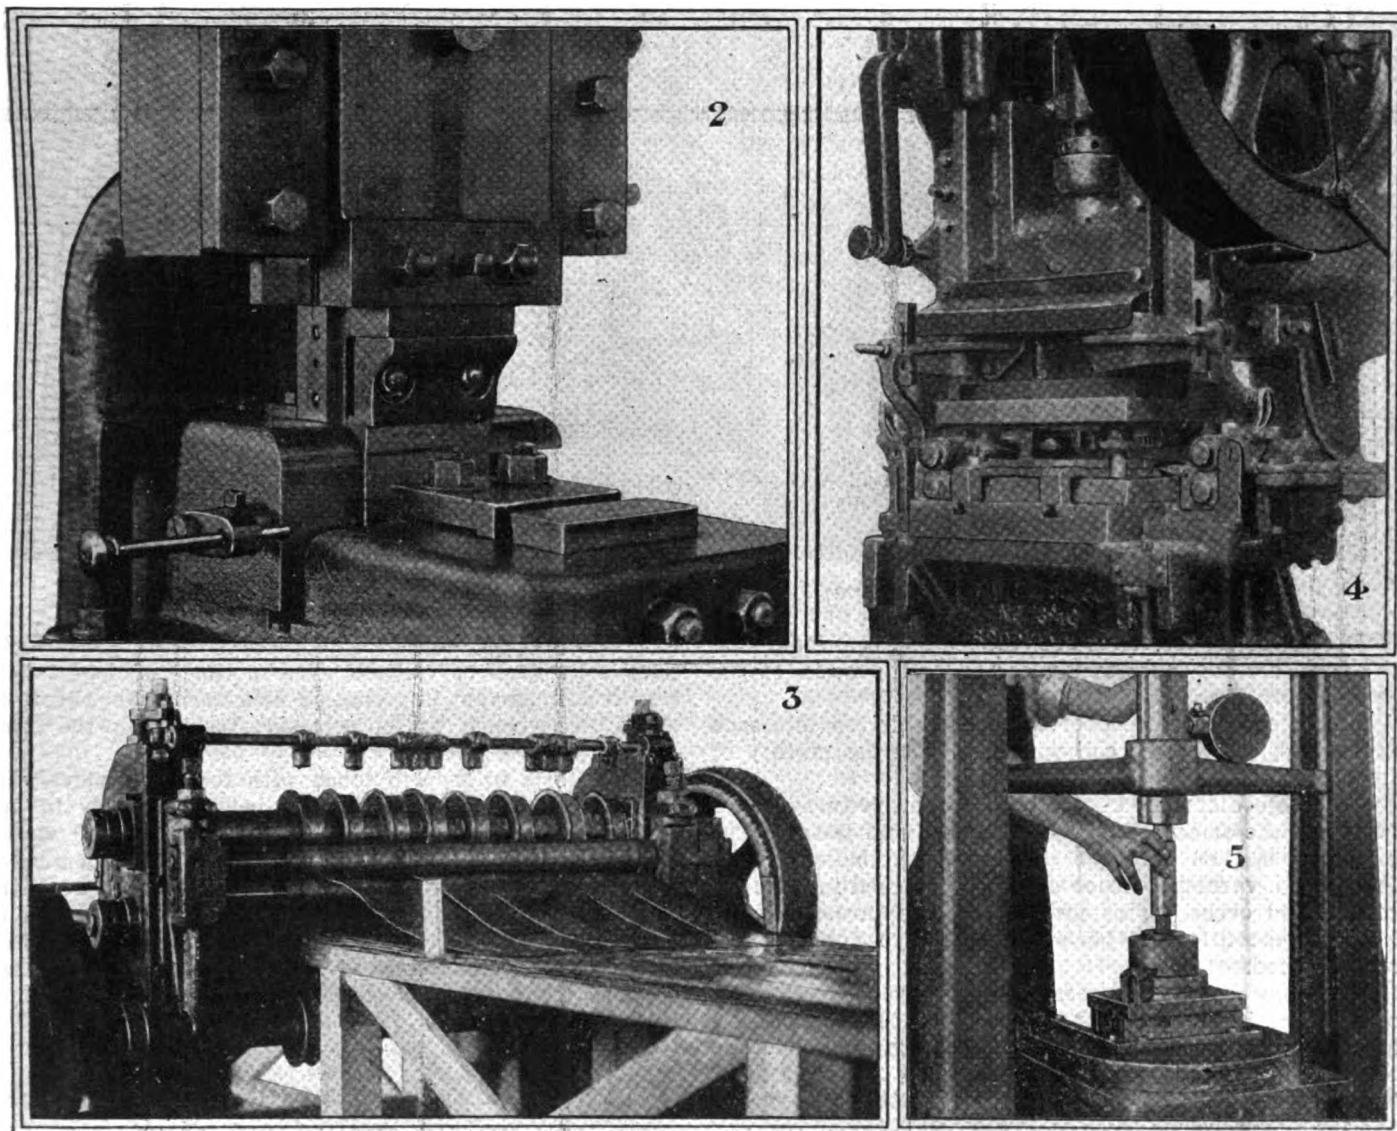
Knurling machine. Fig. 3—Rolls used in slitting metal to sizes suitable for punch press in punching core laminations. Fig. 4—Roller feed punch press and dies used in stamping core laminations. Fig. 5—Assembling core laminations to shaft
